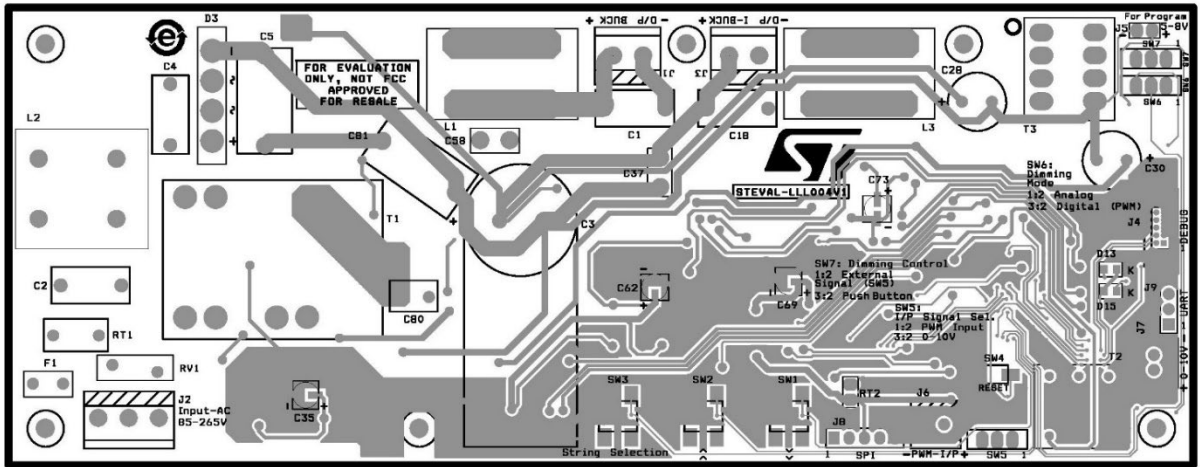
STEVAL-LLL004V1 layout bottom layer silk screen and drill
